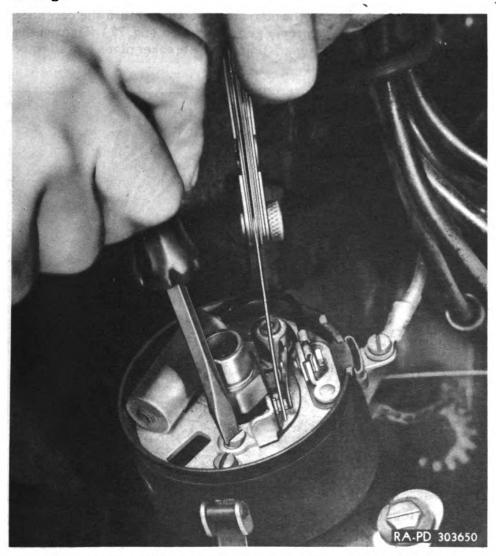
Adjusting Breaker Point Gap to 0.020 inches
